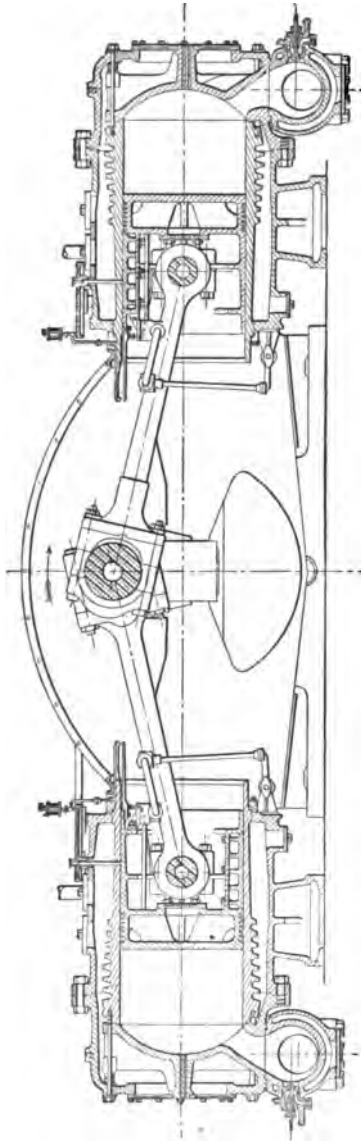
Section of the opposed two-cylinder American Crossley gas-engine, as built by the Power and Mining Machinery Company, New York City. In sizes from 150 to 650 horse-power.
